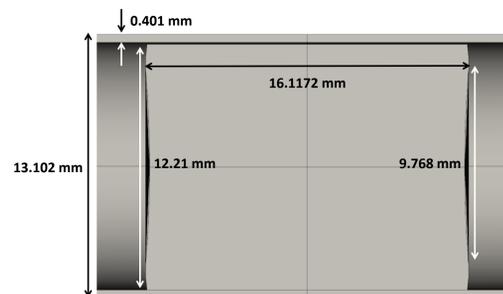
Schematic view of a cross-section of a fuel pellet showing dimensions.
